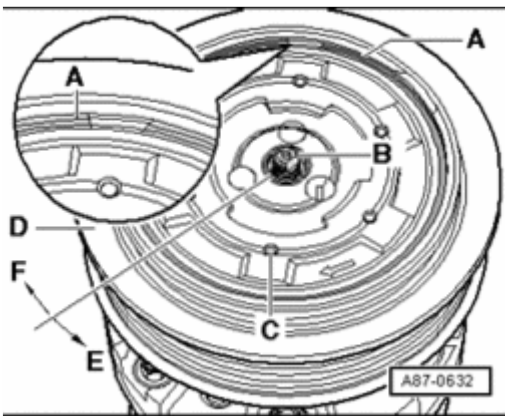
Identifying Drive Plate, Circlip, And Pulley
